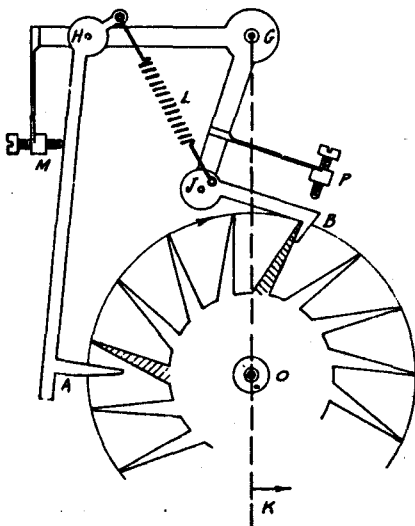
The engaged escape wheel tooth/exit-pallet is impulsing the pendulum to the right. The entry-pallet is seeking engagement with its nearest approaching tooth
